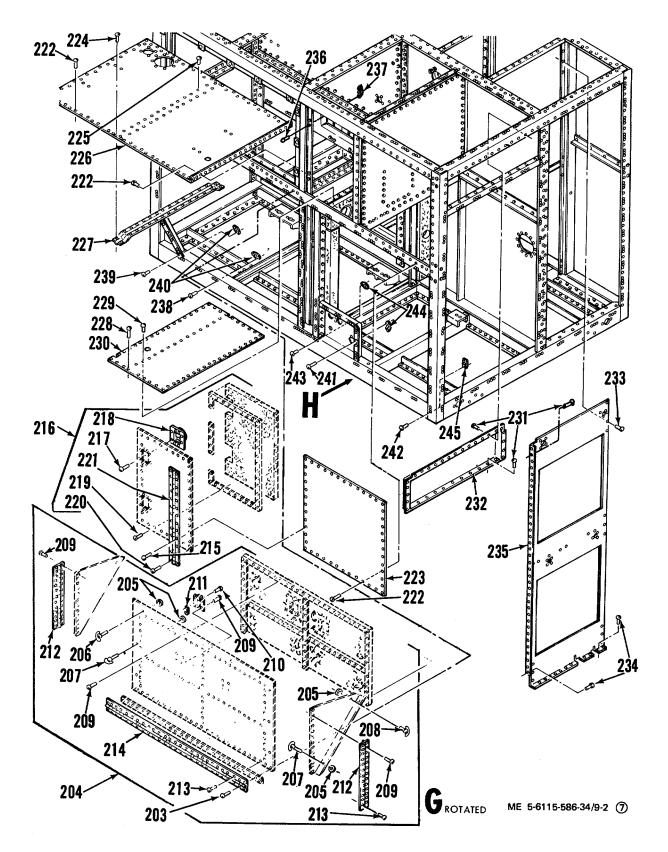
Shell assembly, exploded view. (sheet 7 of 9)
